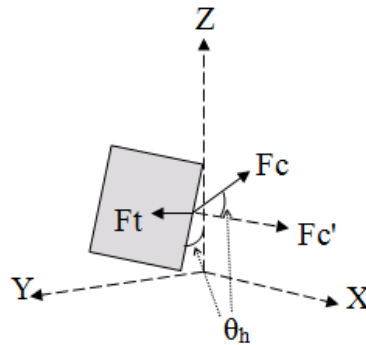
Small element on the cutting tooth face of the micro-tool
